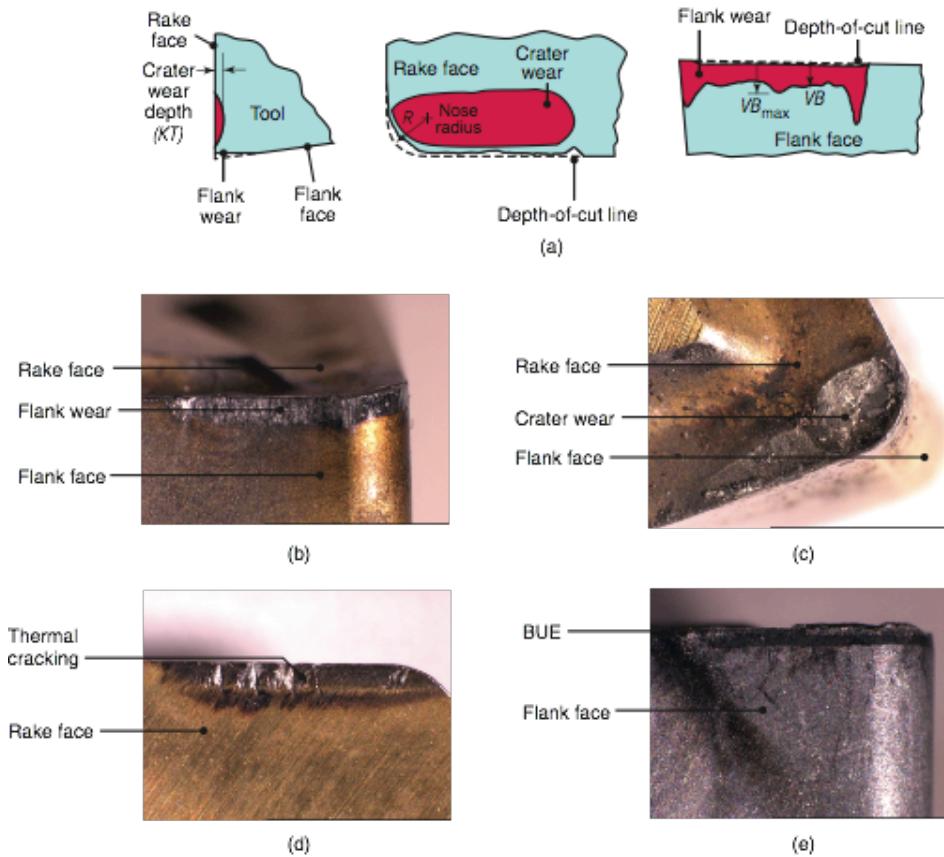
Examples of wear in cutting tools. (a) Flank wear; (b) crater wear; (c) chipped cutting edge; (d) thermal cracking on rake face; (e) flank wear and built-up edge. Source: Courtesy of Kennametal, Inc.
